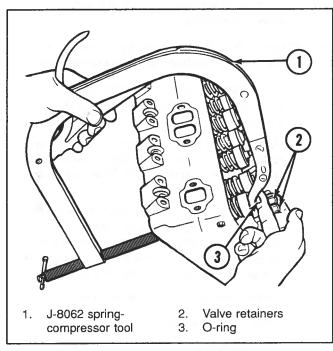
Compressing Valve Spring With Cylinder Head Removed
